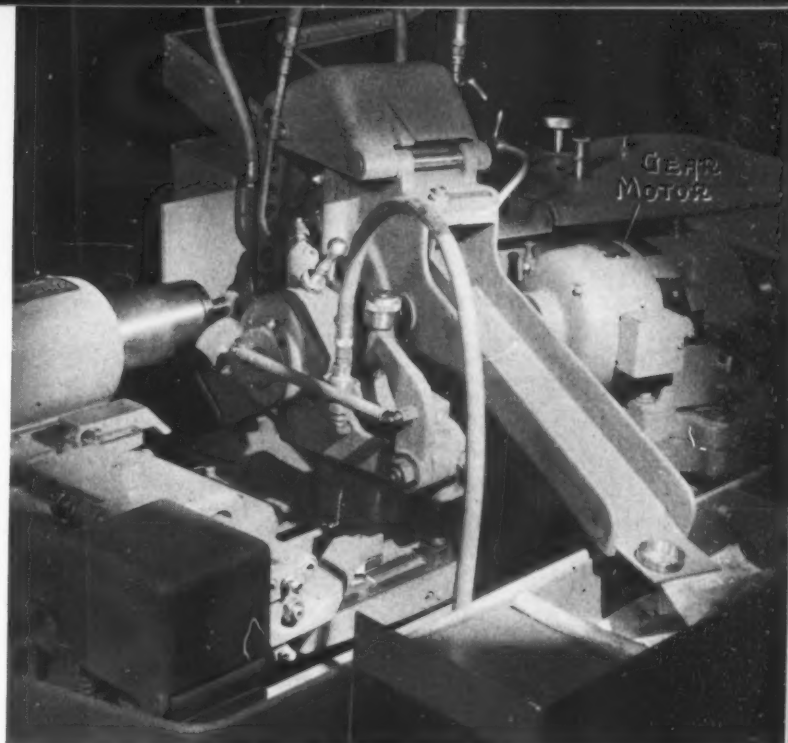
Above — Gear-motor drives large roll to provide constant grinding speed of workpiece
